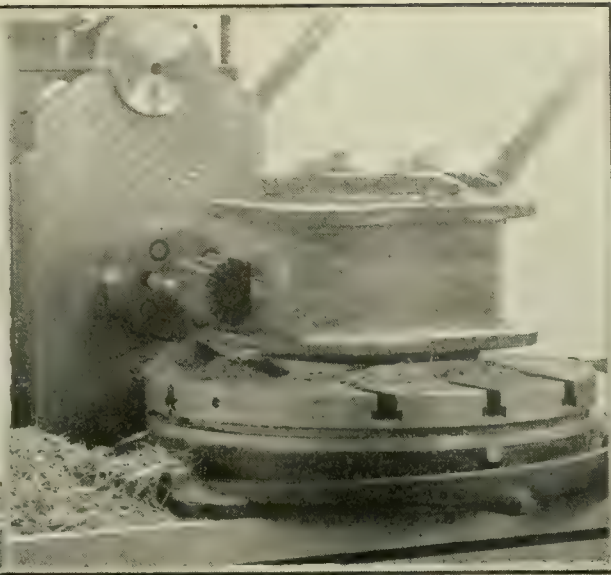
MILLING LOCOMOTIVE CONNECTING ROD BRASSES.
